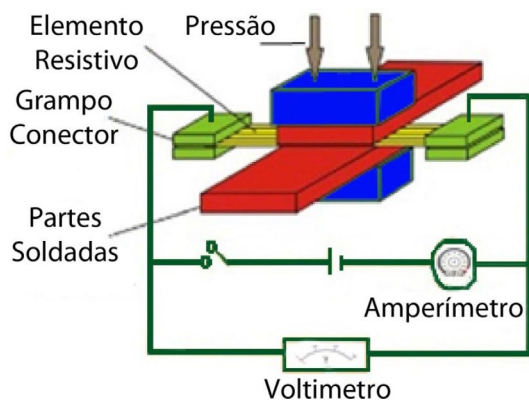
Illustration of a resistance welding system for polymer composites [2]. Elemento Resistivo = Resistive element; Pressão = Pressure; Grampo Conector = Connecting clamp; Partes Soldadas = Parts being welded; Amperímetro = Ammeter; Voltímetro = Voltmeter.
